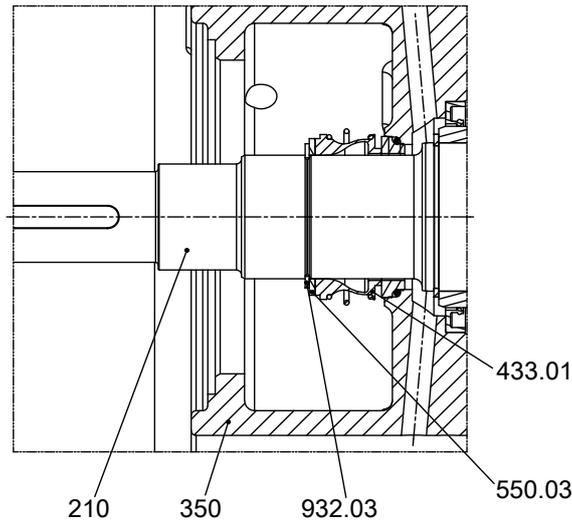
Drawing of the drive-end mechanical seal for motors 60 6.N, 80 6.N, 50 8.N, 65 8.N, 75 8.N, 90 8.N, 110 8.N., 130 8.N, 40 10.N, 60 10.N, 75 10.N, 90 10.N
